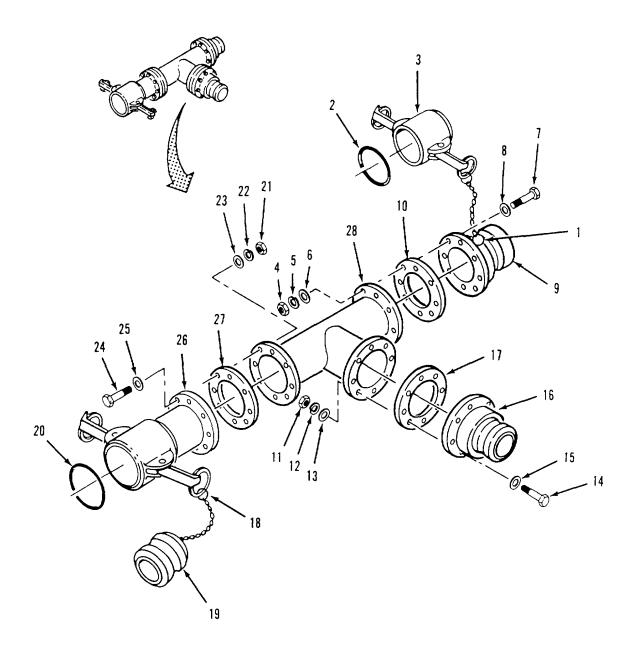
Tee Assembly (9115-Y1) Disassembly.
